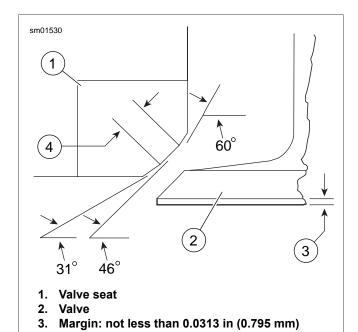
Intake and Exhaust Valve and Seat Dimensions
